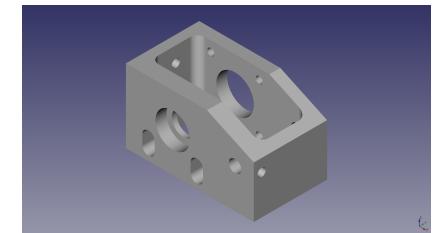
Begonia 3D Printed Lower Z Left Render
